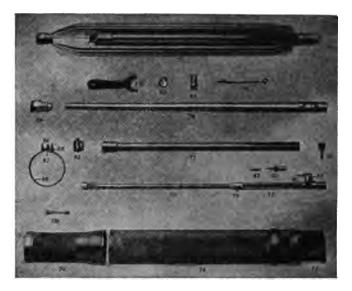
GUN PARTS: BARREL GROUP, AND PISTON ROD
